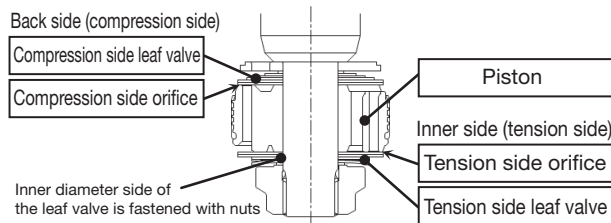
Inner seat surface form within the piston of the newly developed valve
